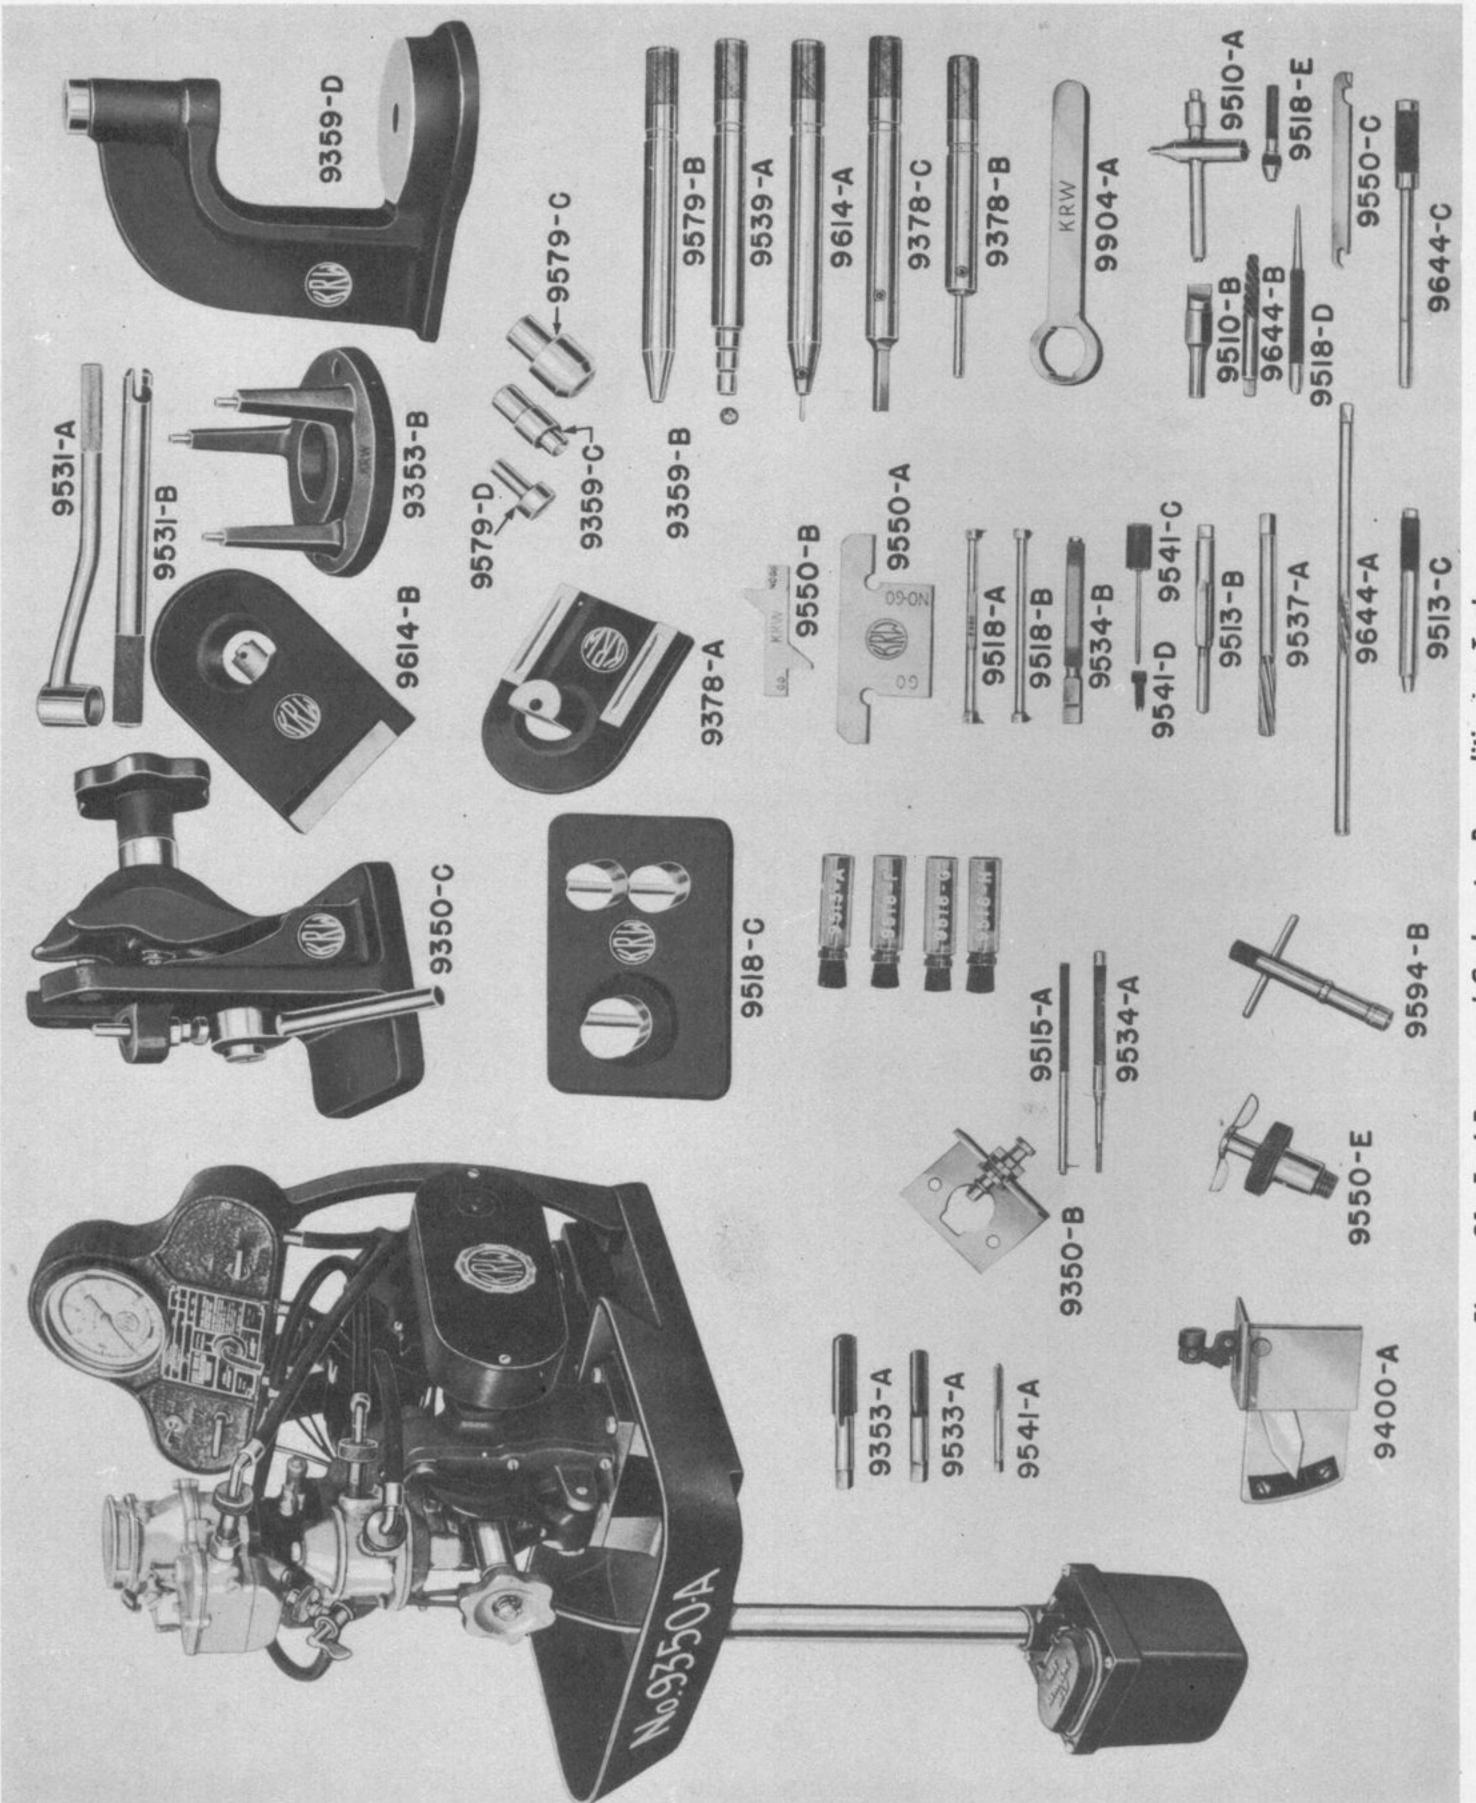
Fuel Pump and Carburetor Reconditioning Tools
